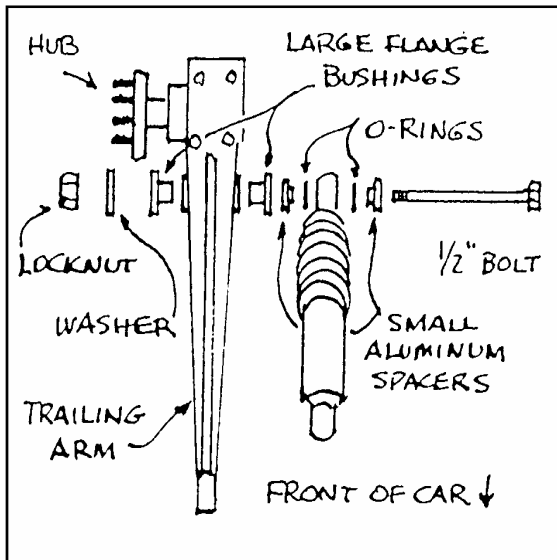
Top view, right rear suspension: lower bolt detail. Note that bolt goes in from the inside. Left side mounting in reverse.
